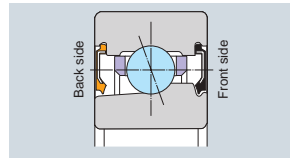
High-speed grease-lubricated sealed angular contact ball bearings
